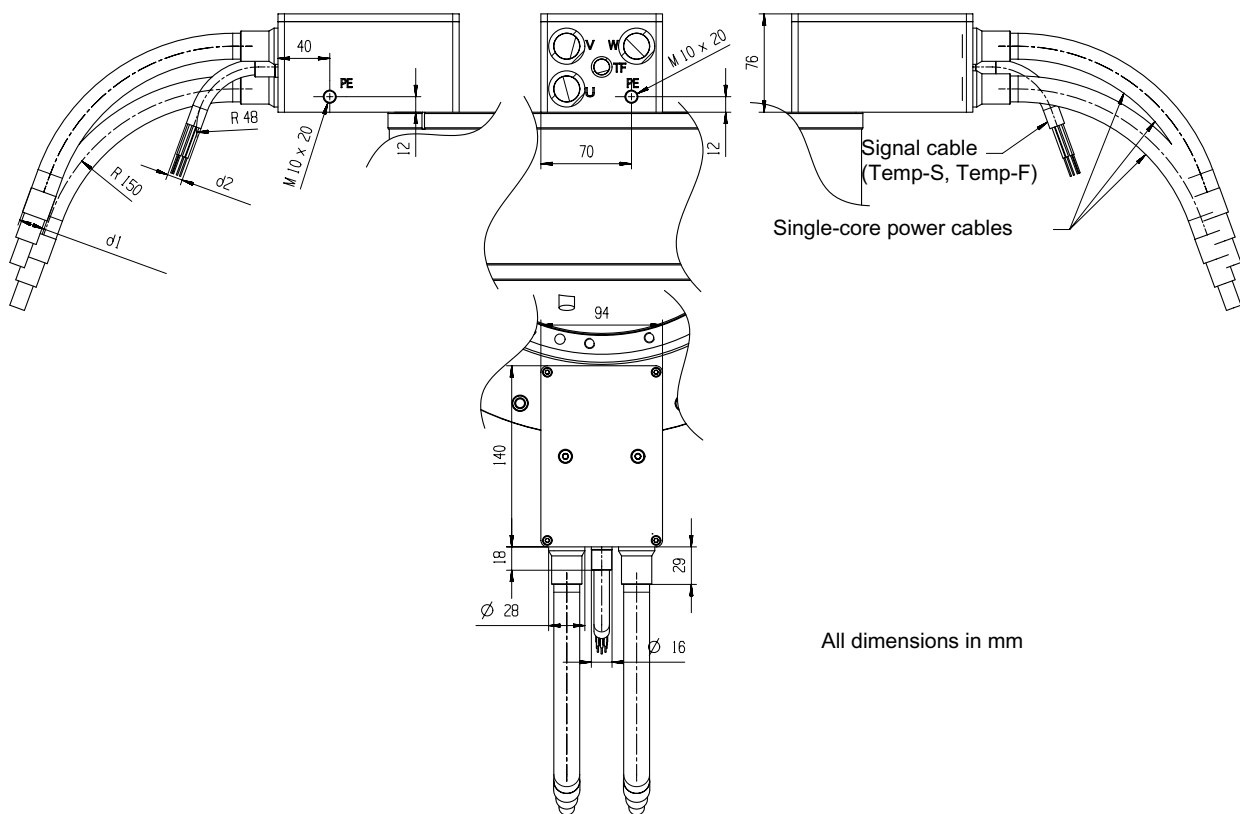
Radial electrical connection towards the outside with sleeve and single core for 1FW6160, 1FW6190 and 1FW6230, 70 mm² core cross-section
